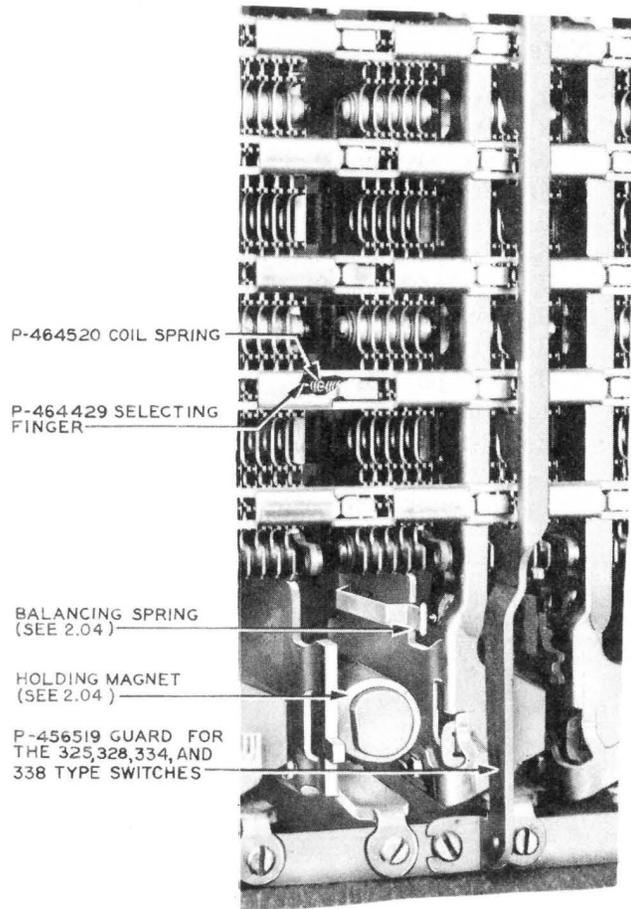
Partial Front View of Switch Showing Vertical Unit With Holding Armature Removed
